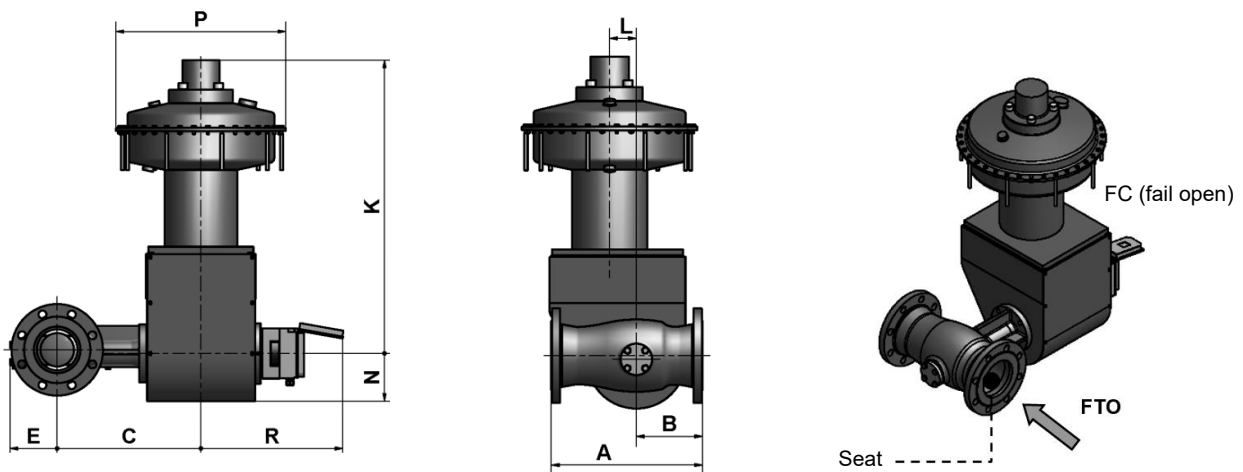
Dimensions - Control valve Type 72.3-02 with MZ and MD · Assembly position B · FC (fail close)
